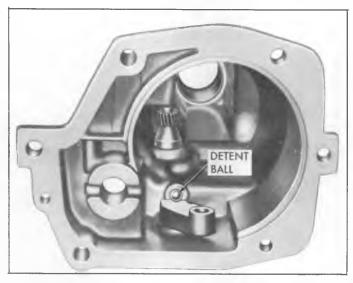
B-Installing Reverse Shifter Shaft and Detent Ball
